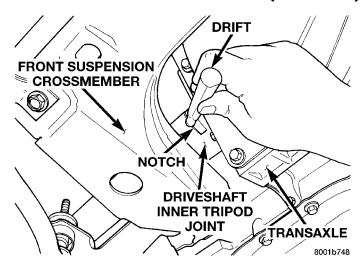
Disengaging Left Inner Tripod Joint from Transaxle
